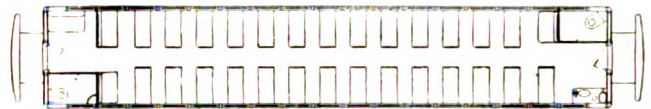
THIRD-CLASS PASSENGER STEAM COACH
